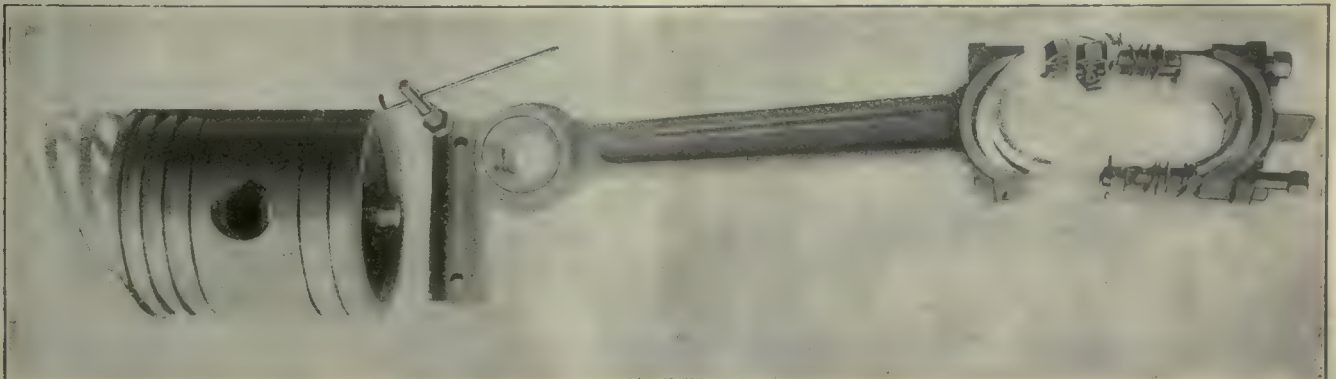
PISTON AND CONNECTING-ROD PARTS
